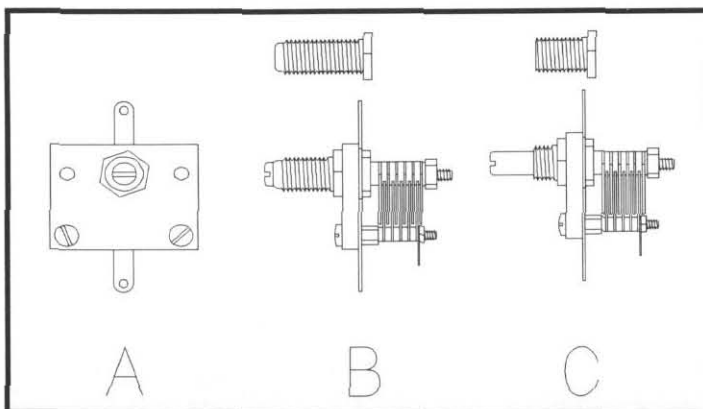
Disassembling and cutting down bushing on screwdriver adjustable Cambion variable capacitor exposes enough shaft to use a knob. B is the original length, C is cut down
